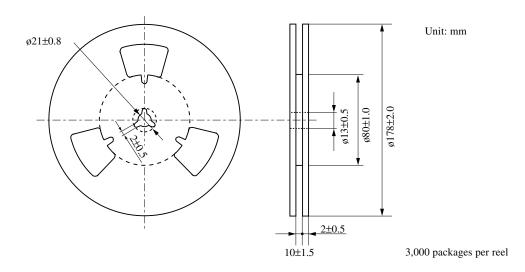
Embossed Taping Reel Dimensions for Mini Type Package
